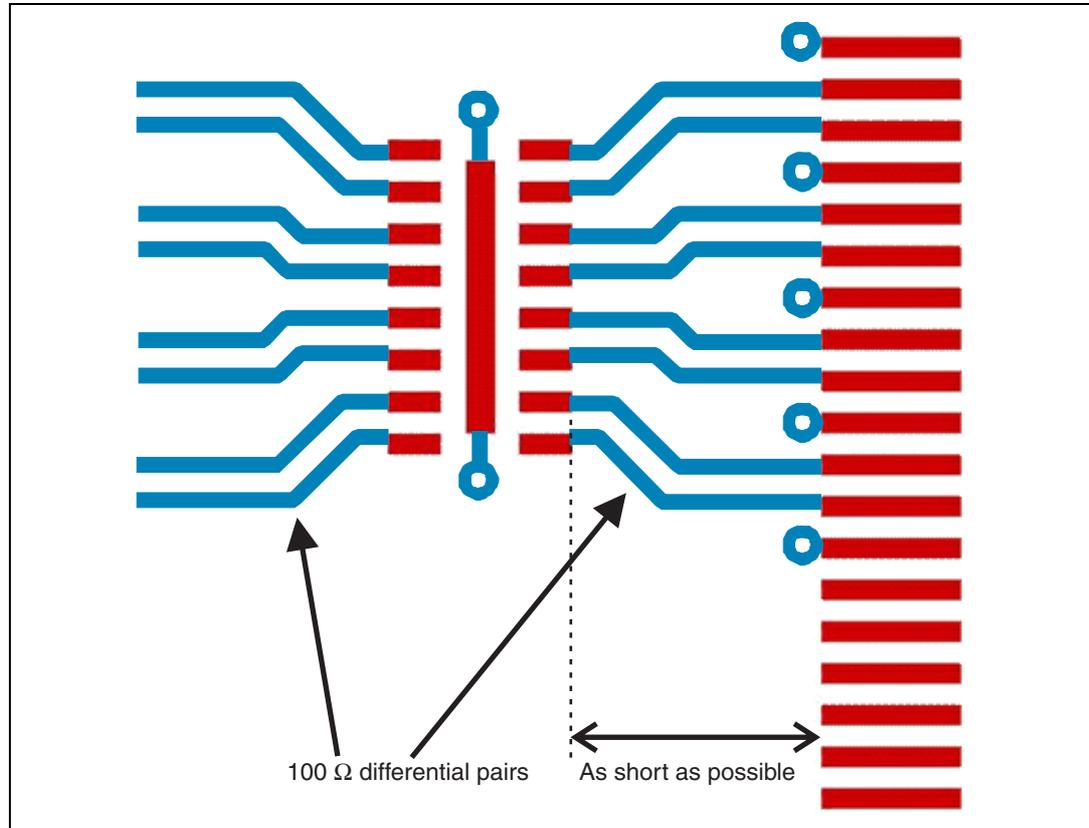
shows an example of PCB layout for HSP061-8M16 with an HDMI type C SMD connector
